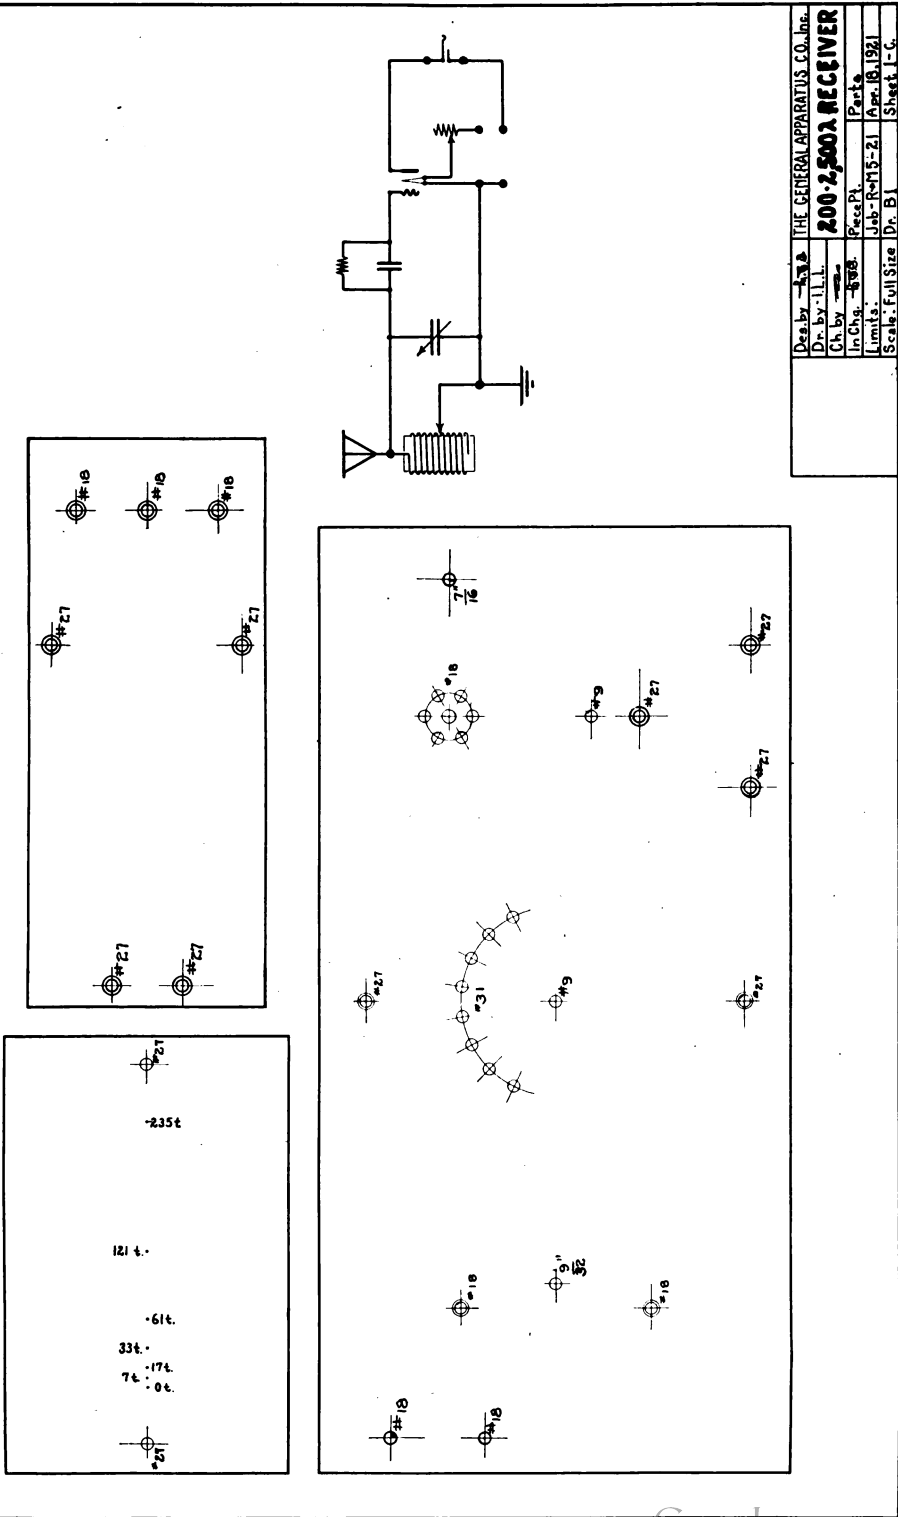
Layout of the coil tube, connection panel, and front panel, shown at one-half scale so that dimensions can be taken directly from the drawings.
